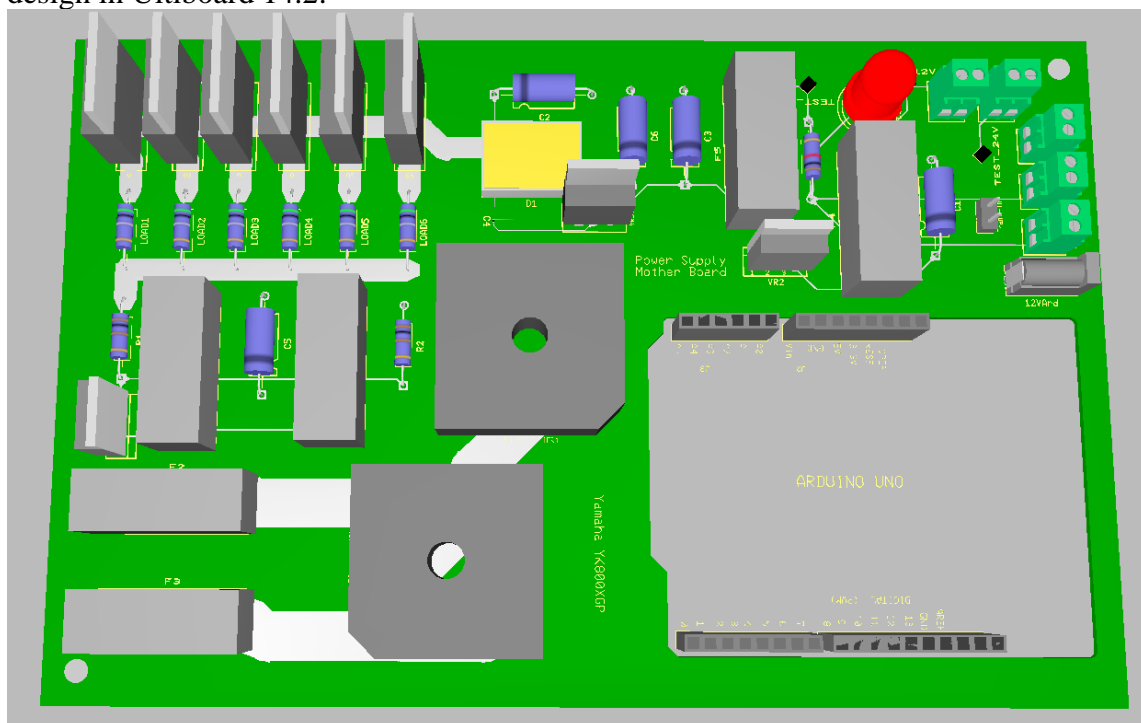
3D Rendering of the Mother Board using Ultiboard 14.2
